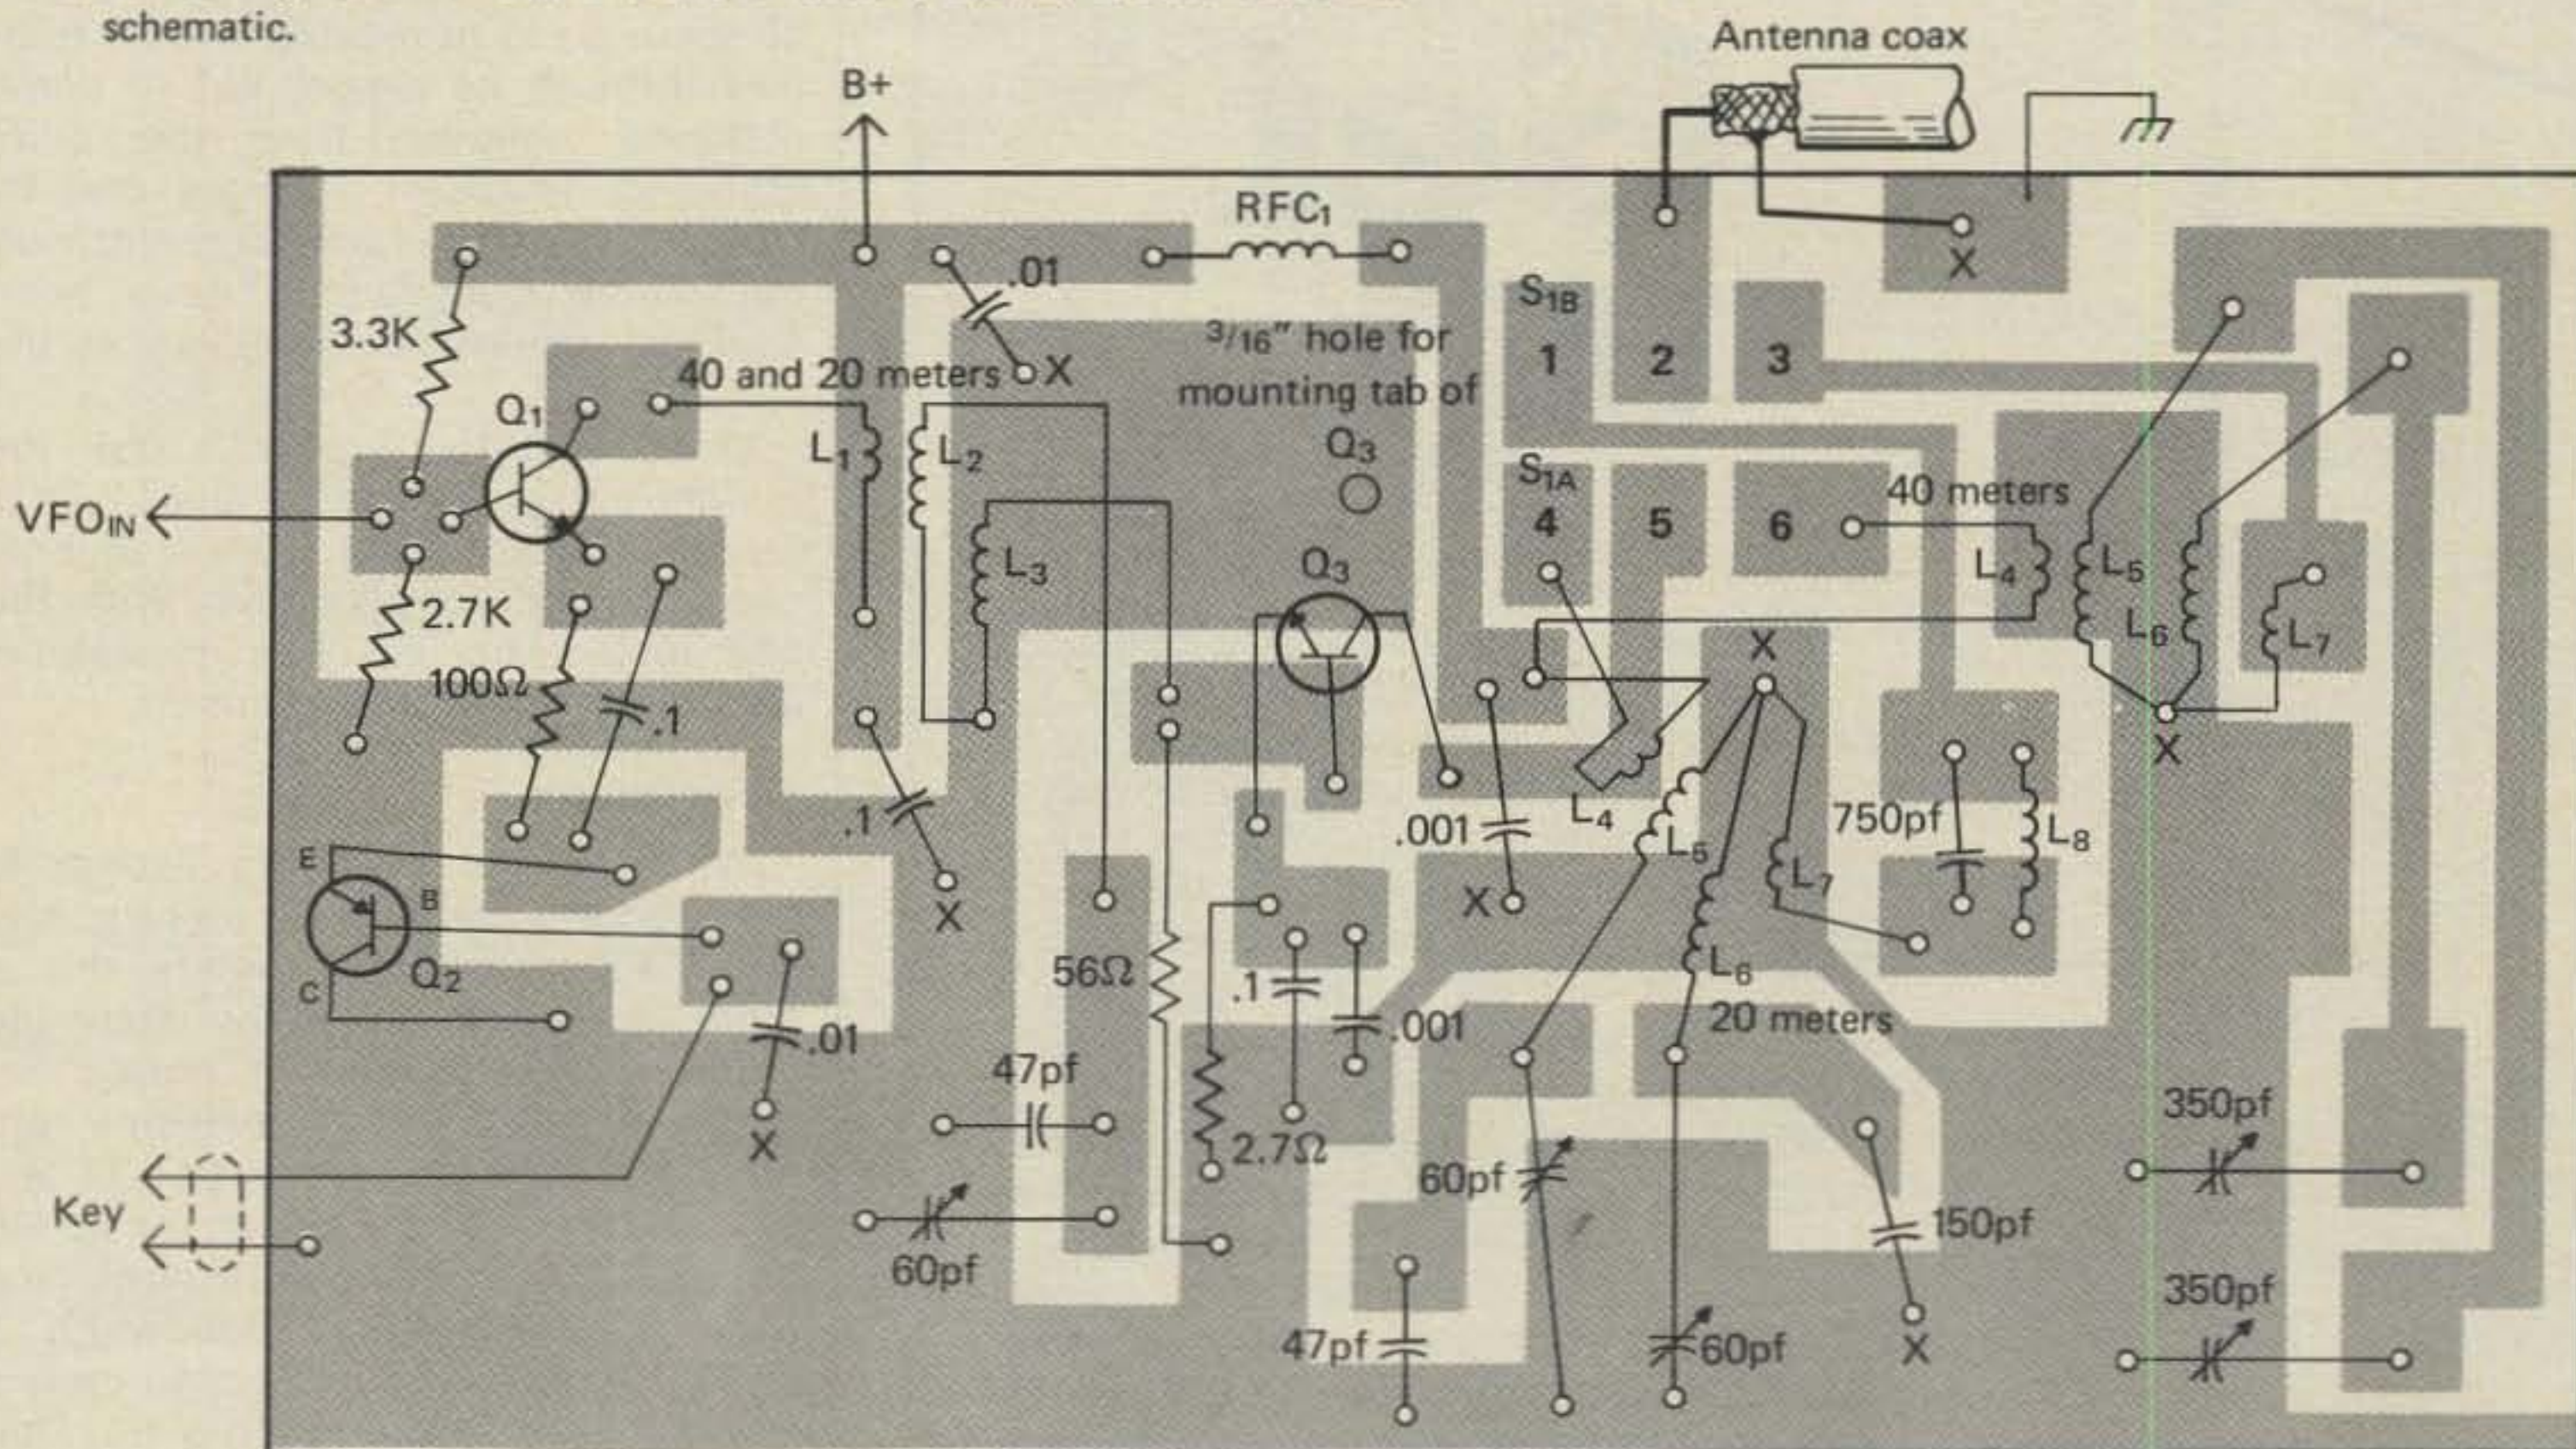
Full size, top view of the p.c. board (A) parts placement on the p.c. board.
